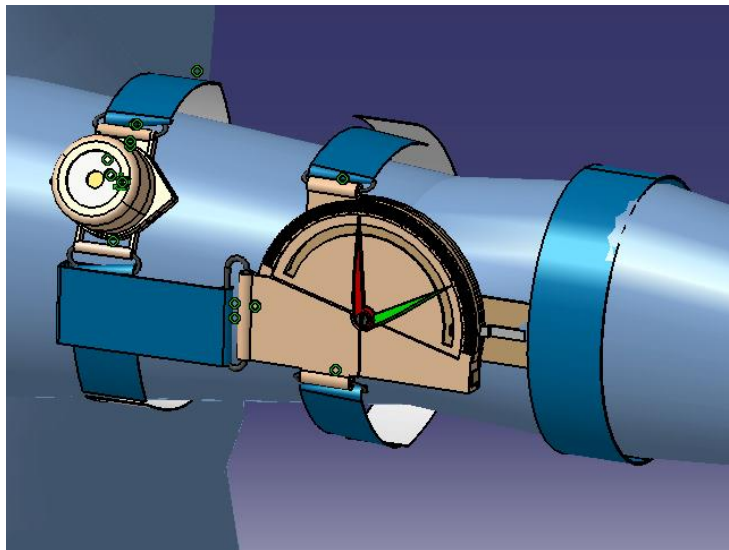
Front View of virtual assembled model wound on the right upper limb of manikin.
